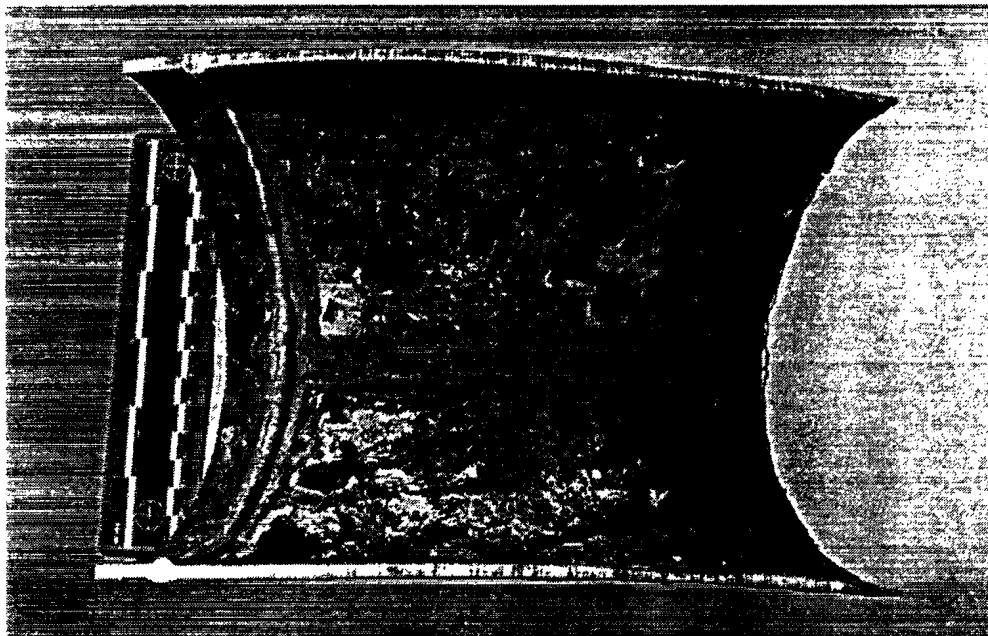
Seamed elbow with weld in direction of flow ground out. Circumferential weld protrudes into flow stream.
